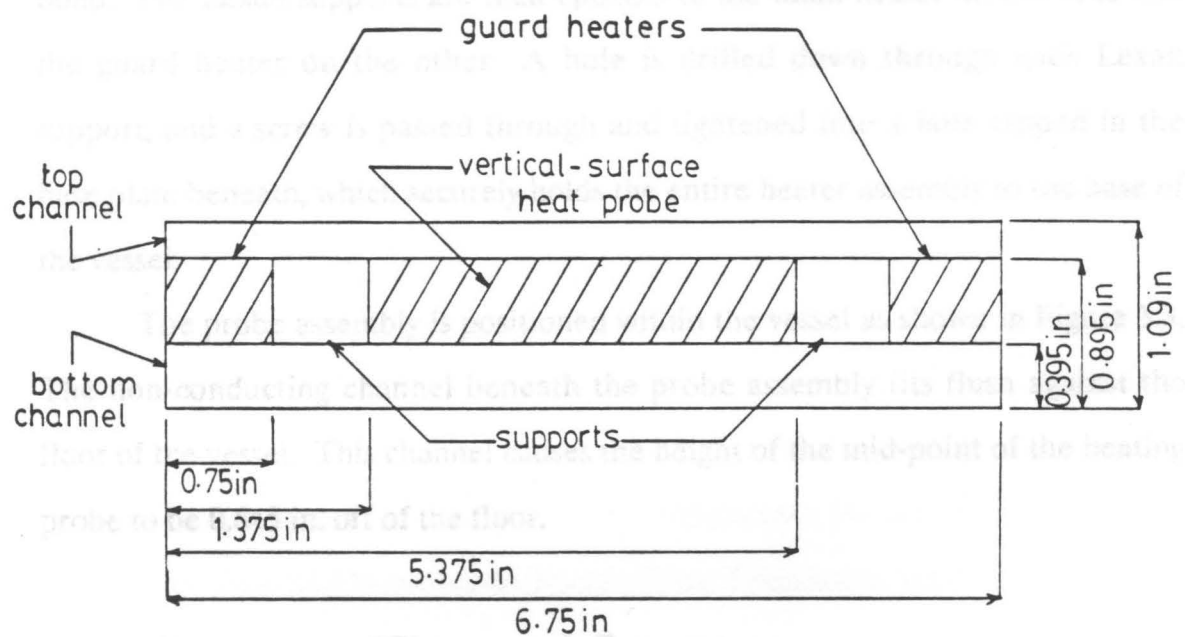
Vertical-surface heat-probe assembly: Side view of the heat-probe assembly showing the top and bottom insulating channels and guard heaters, separated from the main heater by Lexan supports.
